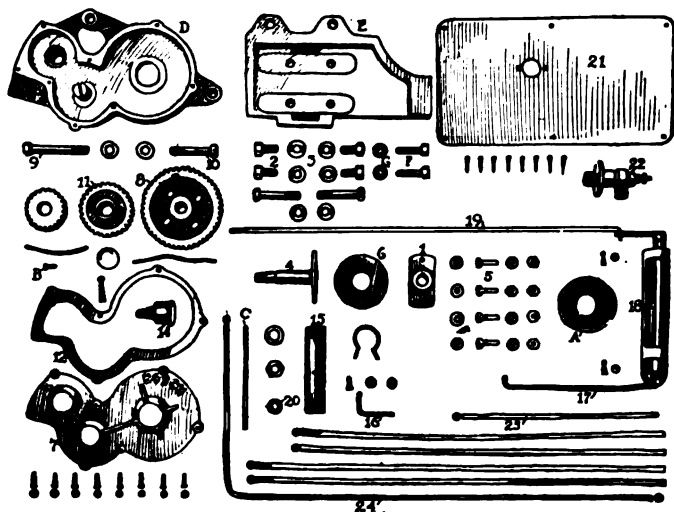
Entire gear-driven Bosch outfit for Fords disassembled
